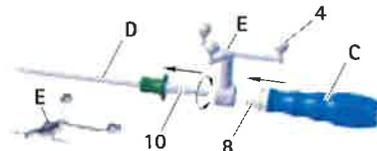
Mounting the IGS Tool Star Unit and S<sup>4</sup>C handle (FW067R or FW165R) onto the S<sup>4</sup>C screwdriver
